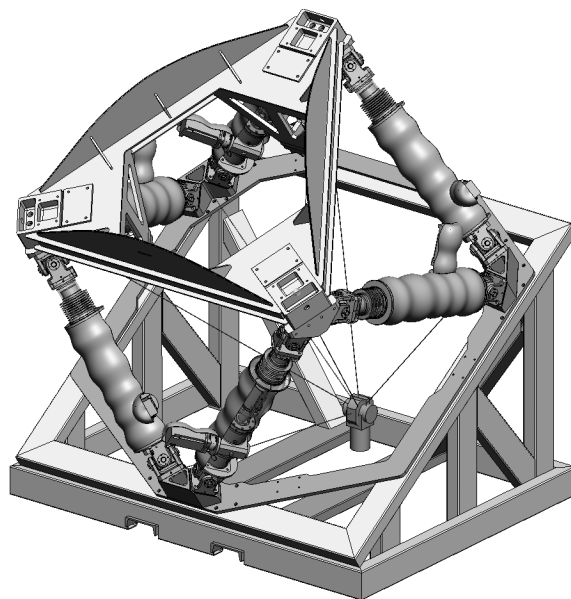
The hexapod in testing configuration on its test stand with laser targets positioned at the corner nodes.
